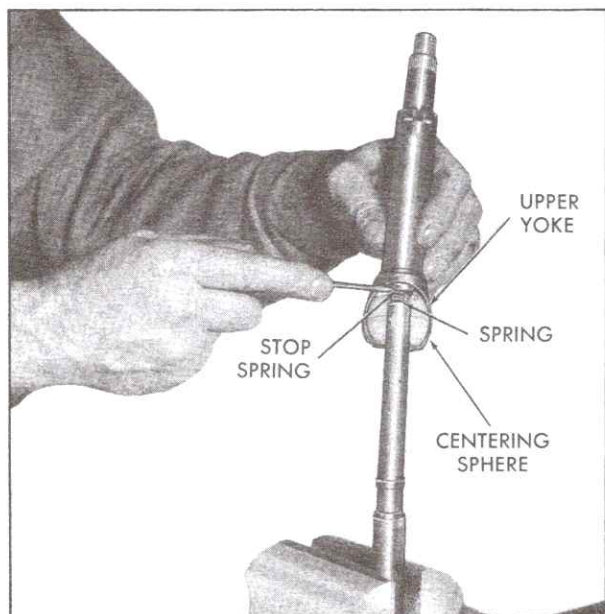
Installing Spring and Stop Spring in Steering Shaft
